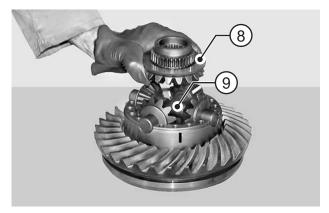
Remove the crown wheel (8) and planetary gears set (9).
